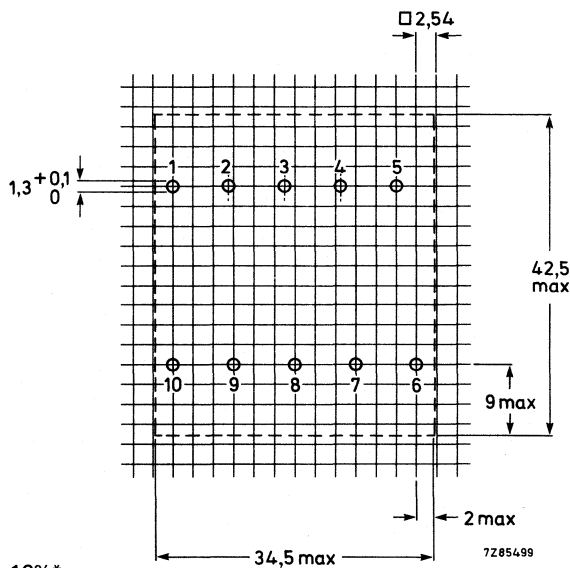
Hole pattern for mounting on a printed-wiring board, viewed from the solder side.
